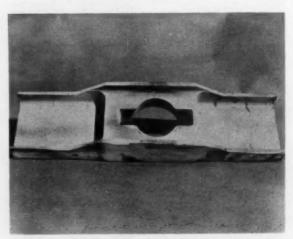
Surface cracking caused by rapid chilling and restrictions of machined graphite mold.
